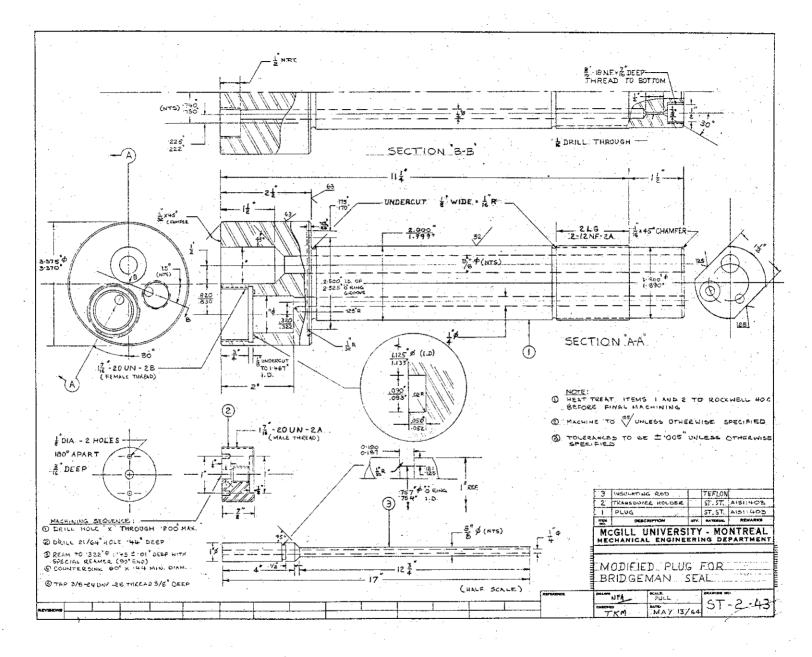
ENGINEERING DRAWING OF MODIFIED BRIDGEMAN PLUG
